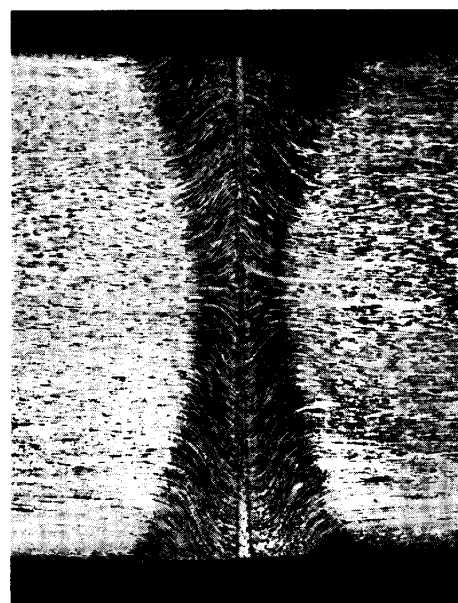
Metal-Flow of Welded Seam with Edge Milling Machine
